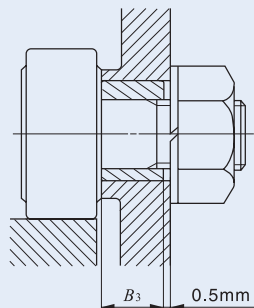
Length of the mounting hole of Eccentric Type Cam Follower
